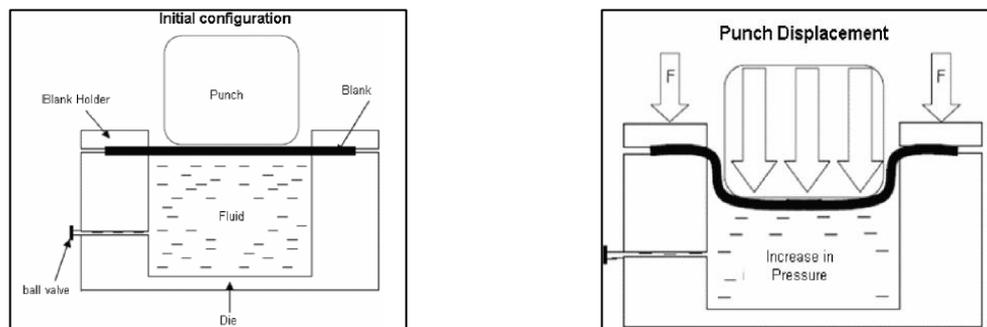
Hydro Mechanical Deep Drawing Process (a) Initial configuration (b) Punch Displacement
